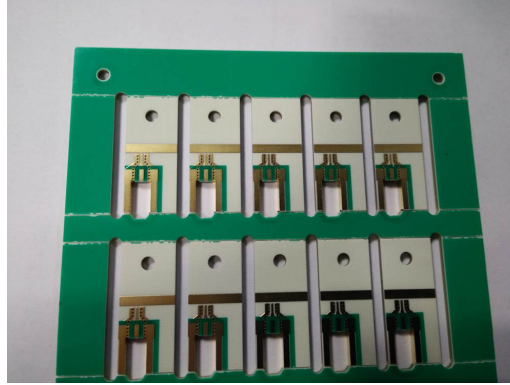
Array of fabricated RF interposer boards before soldering of the connectors.
